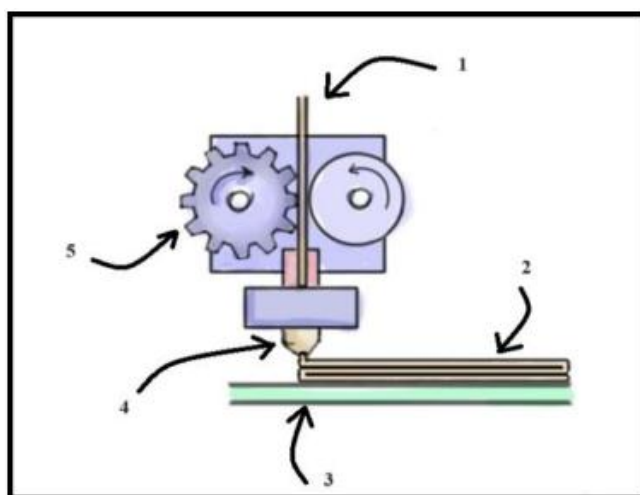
Layer-by-layer deposition scheme: 1 – thermoplastic filament, 2 – first layers of printed object, 3 – work table, 4 – print head, 5 – extruder drawing the filament to the print head
